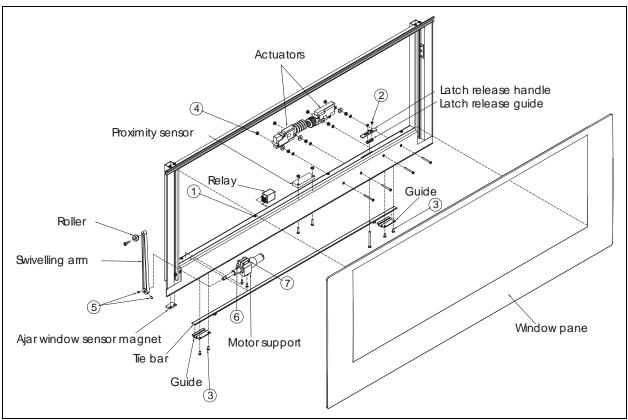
ELECTRIC AWNING WINDOW EXPLODED VIEW (SASH)
